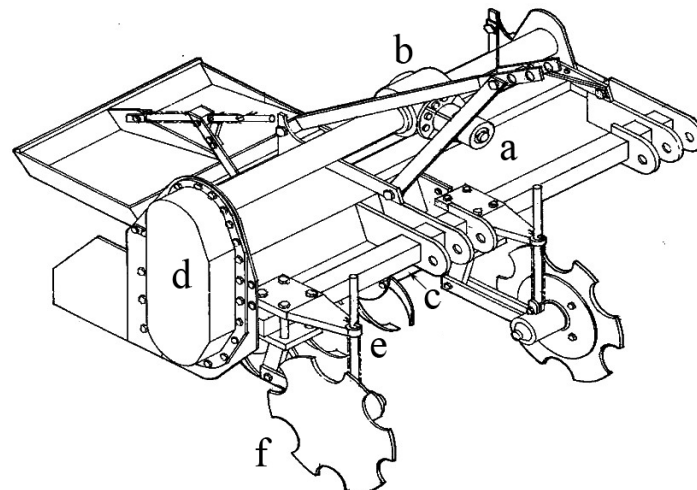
Prototype of the developed inter-row cultivator: (a) power take-off (PTO) shaft; (b) gear box; (c) rotor; (d) chain box; (e) blade; and (f) notch-cutting disc.
